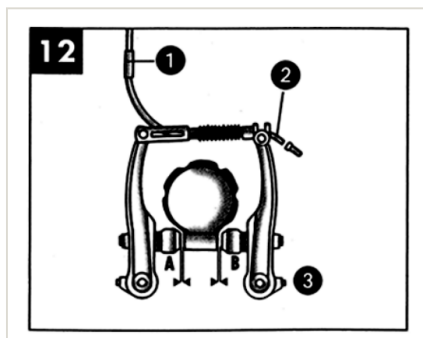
1 aluminium tube · 2 tightening torque 6/8 Nm · 3 A + B = 3 mm
